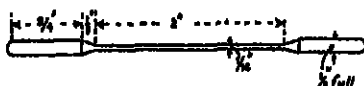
Shape of Test Sample of Gutta-Percha.
